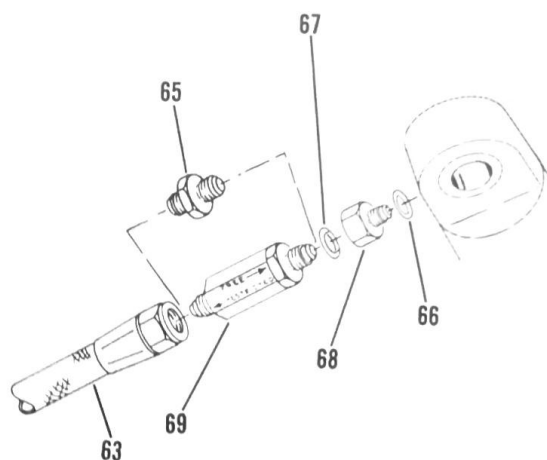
Main Gear &amp; Wheel Well Hydraulic Installation (Sheet 1 of 3)
